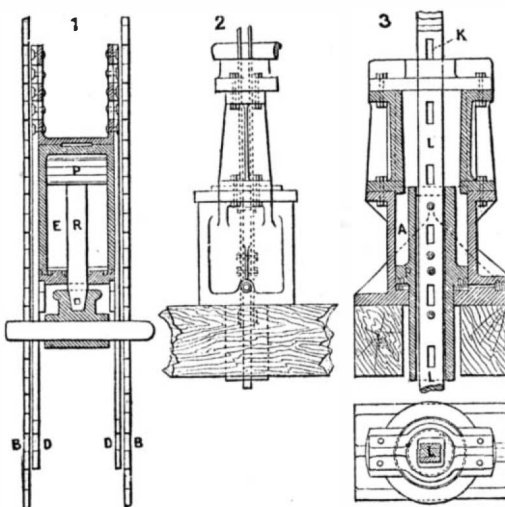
HYDRAULIC CYLINDER, FOR RAISING AND LOWERING MOVABLE PLATFORM.
